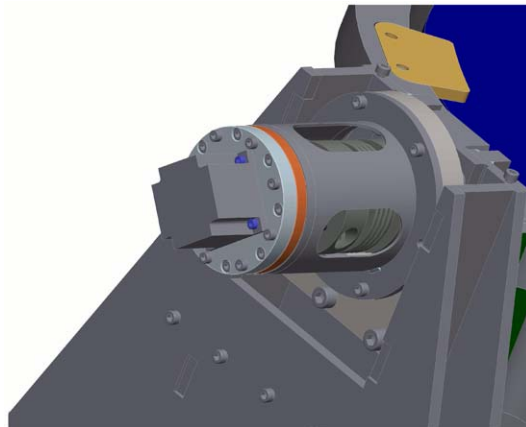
Detailed view of the motor and gearbox, connected to the secondary axis.
